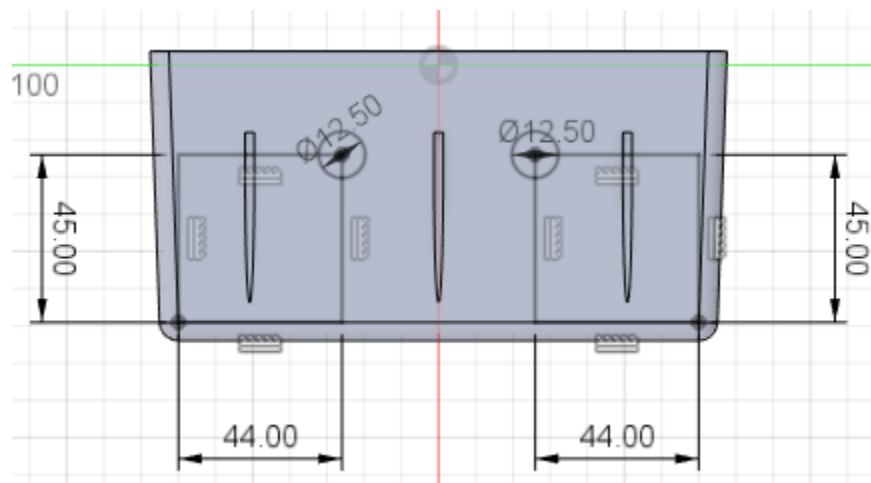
CAD rendering of the side of the pelican case showing hole placements with measurements in mm.
